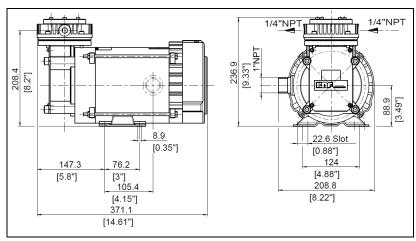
Mounting dimensions UN035A_I EX & UN035T_I EX including .9 versions (All dimensional tolerances conform to DIN ISO 2768-1, Tolerance Class V)
